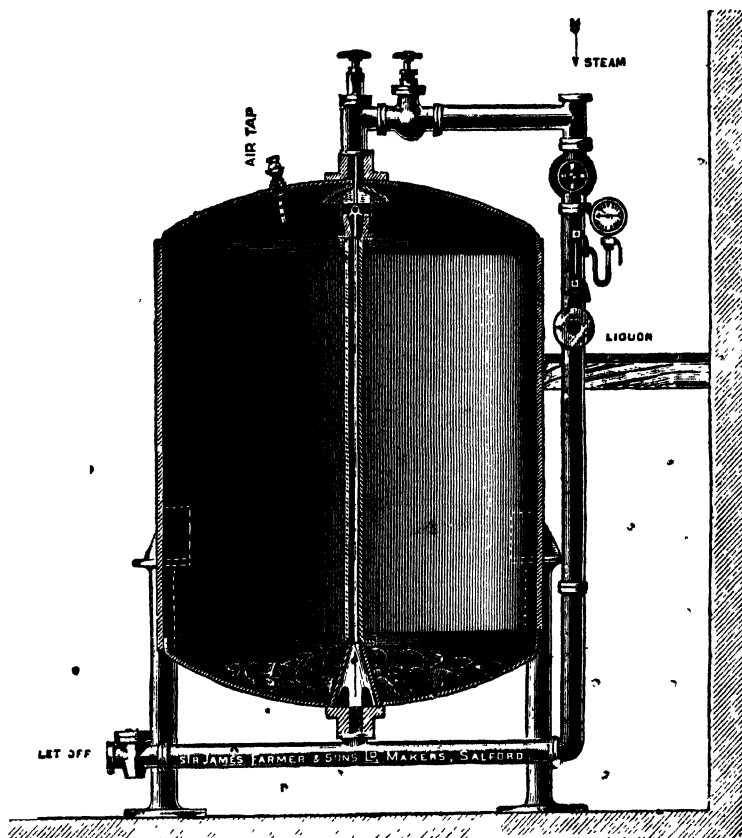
Section of high-pressure injector kier. (Sir James Farmer, Norton & Co., Ltd.)
